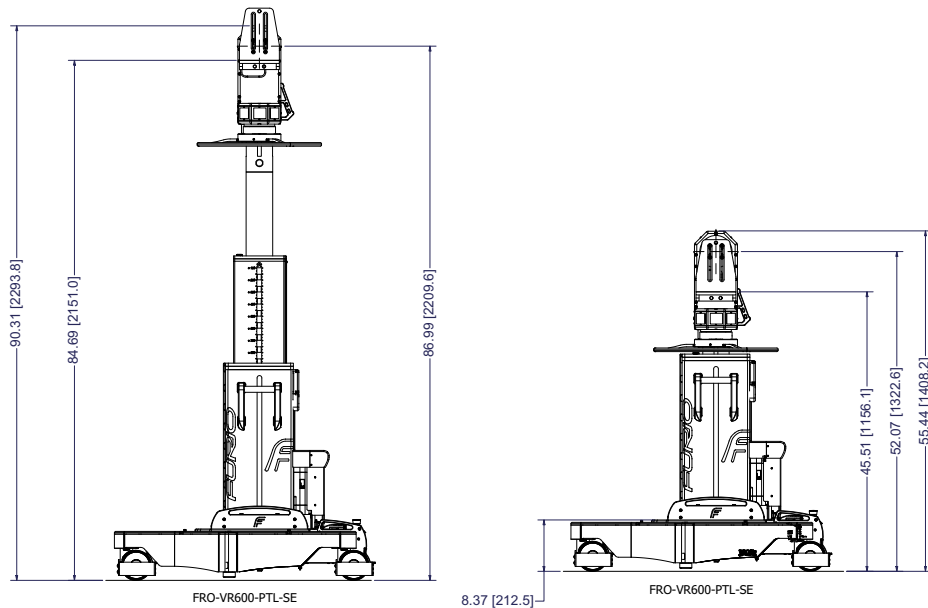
Dimensions of the BlackBird SE Pedestal with a VR600 Head (side view)
